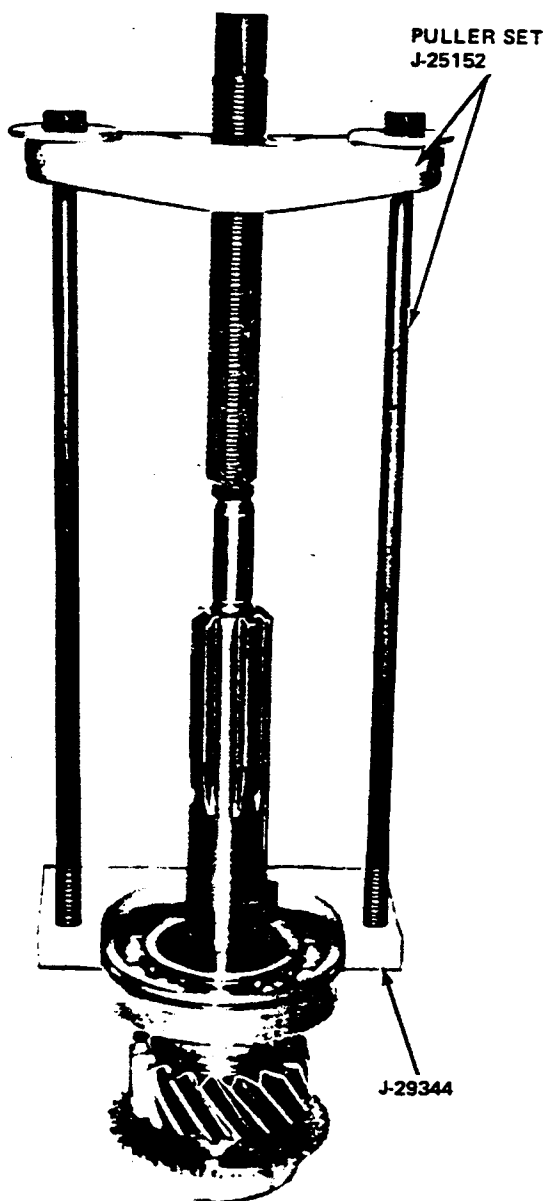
B-56 Removing Front Bearing from Clutch Shaft
